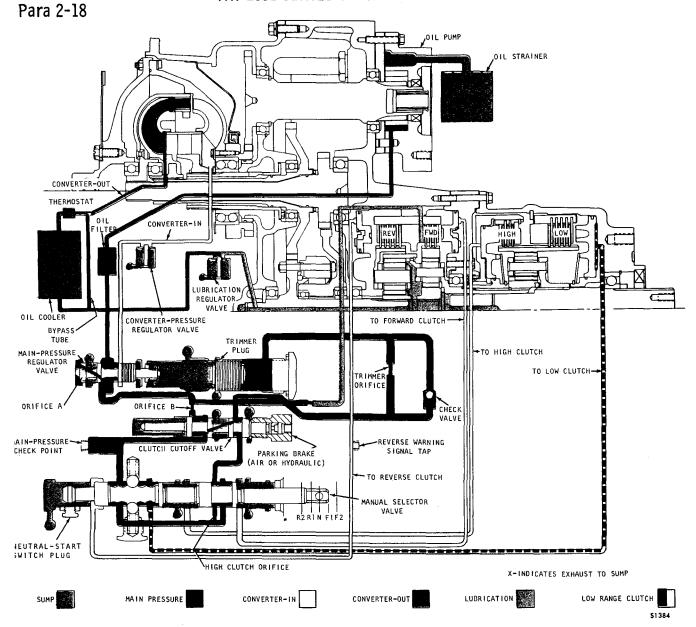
TRT 2221-3 hydraulic system for underdrive model with clutch cutoff—schematic view
